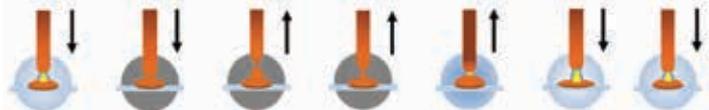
One cycle of drop transfer for the case of the ‘MoTion Control Weld’ welding process [5].
